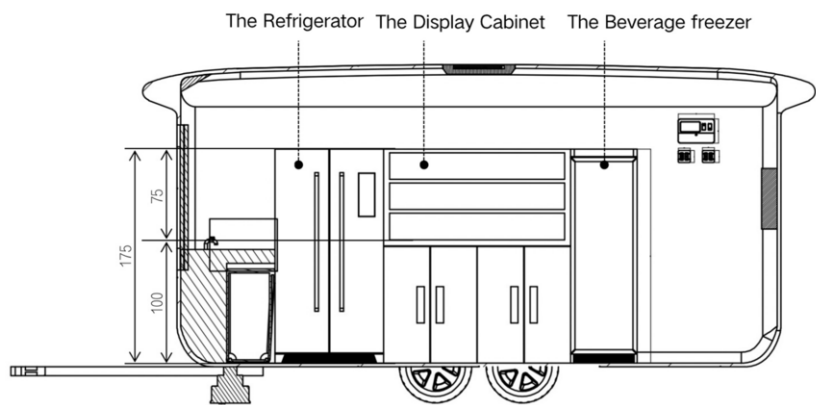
Mobile Food Cart Display Cabinet Dimension Figure.
